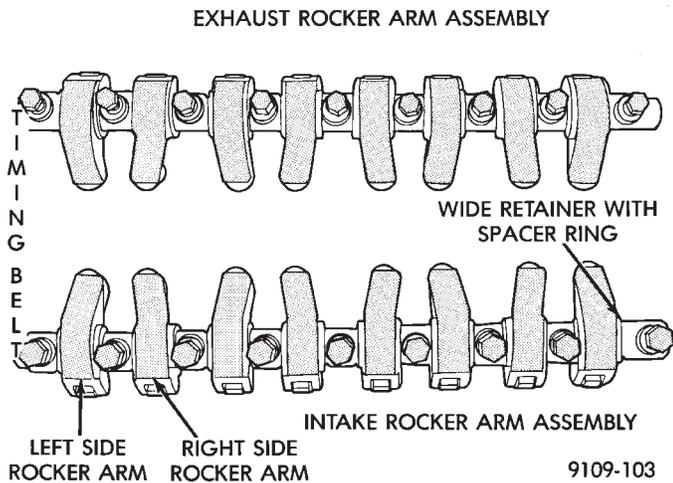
Intake and Exhaust Rocker Arm Assemblies
